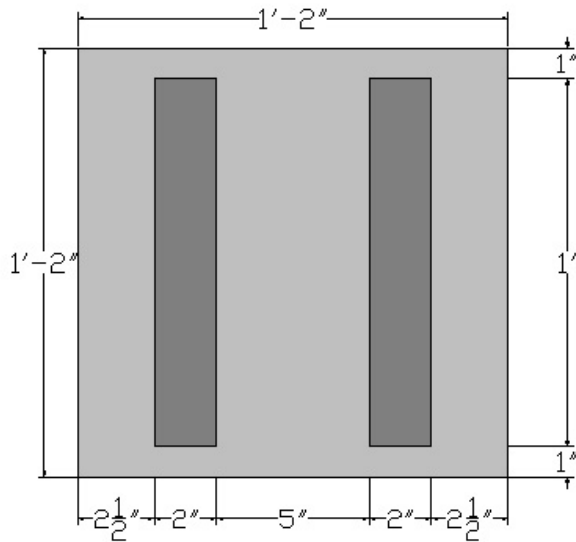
Assembly dimensions: 14" plate with correct placement of 2x12" heaters
